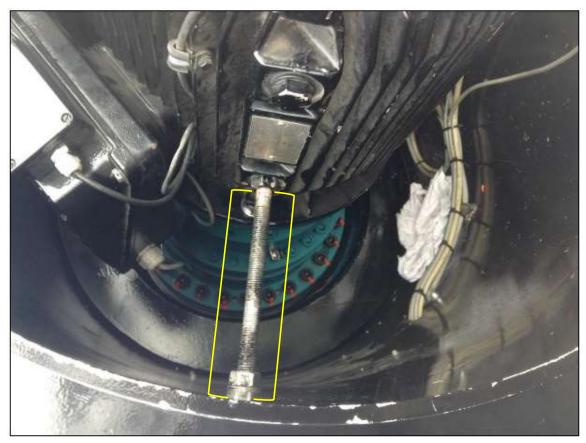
Threaded fastener aligning drive motor to cylinder and gearbox, outlined in yellow, [Lab report].
